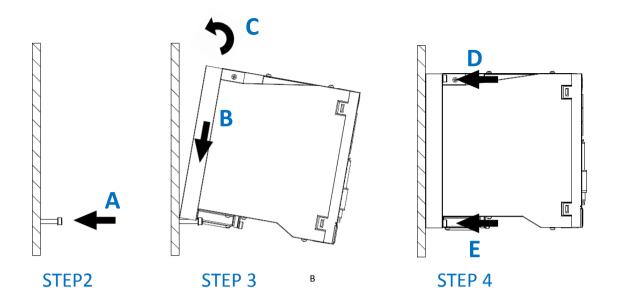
Mechanical Mounting of AMD2000 D2009 Servo Drive
